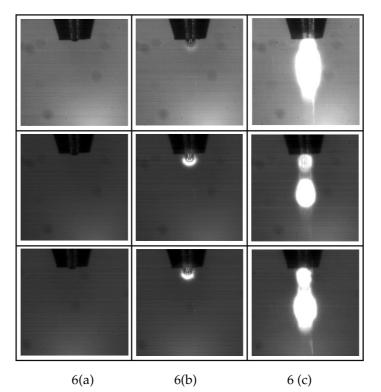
Solder ball jetting process. 6a) The capillary with solder ball before laser apply; solder ball is dark. 6b) The solder ball start to move out from capillary after laser energy applied; color changing in solder ball. 6c) Completely melt solder ball jetting from capillary.
